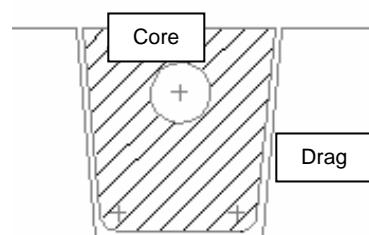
Tapered core and core print. Core has radiused bottom edge. Add offset between mating surfaces.
